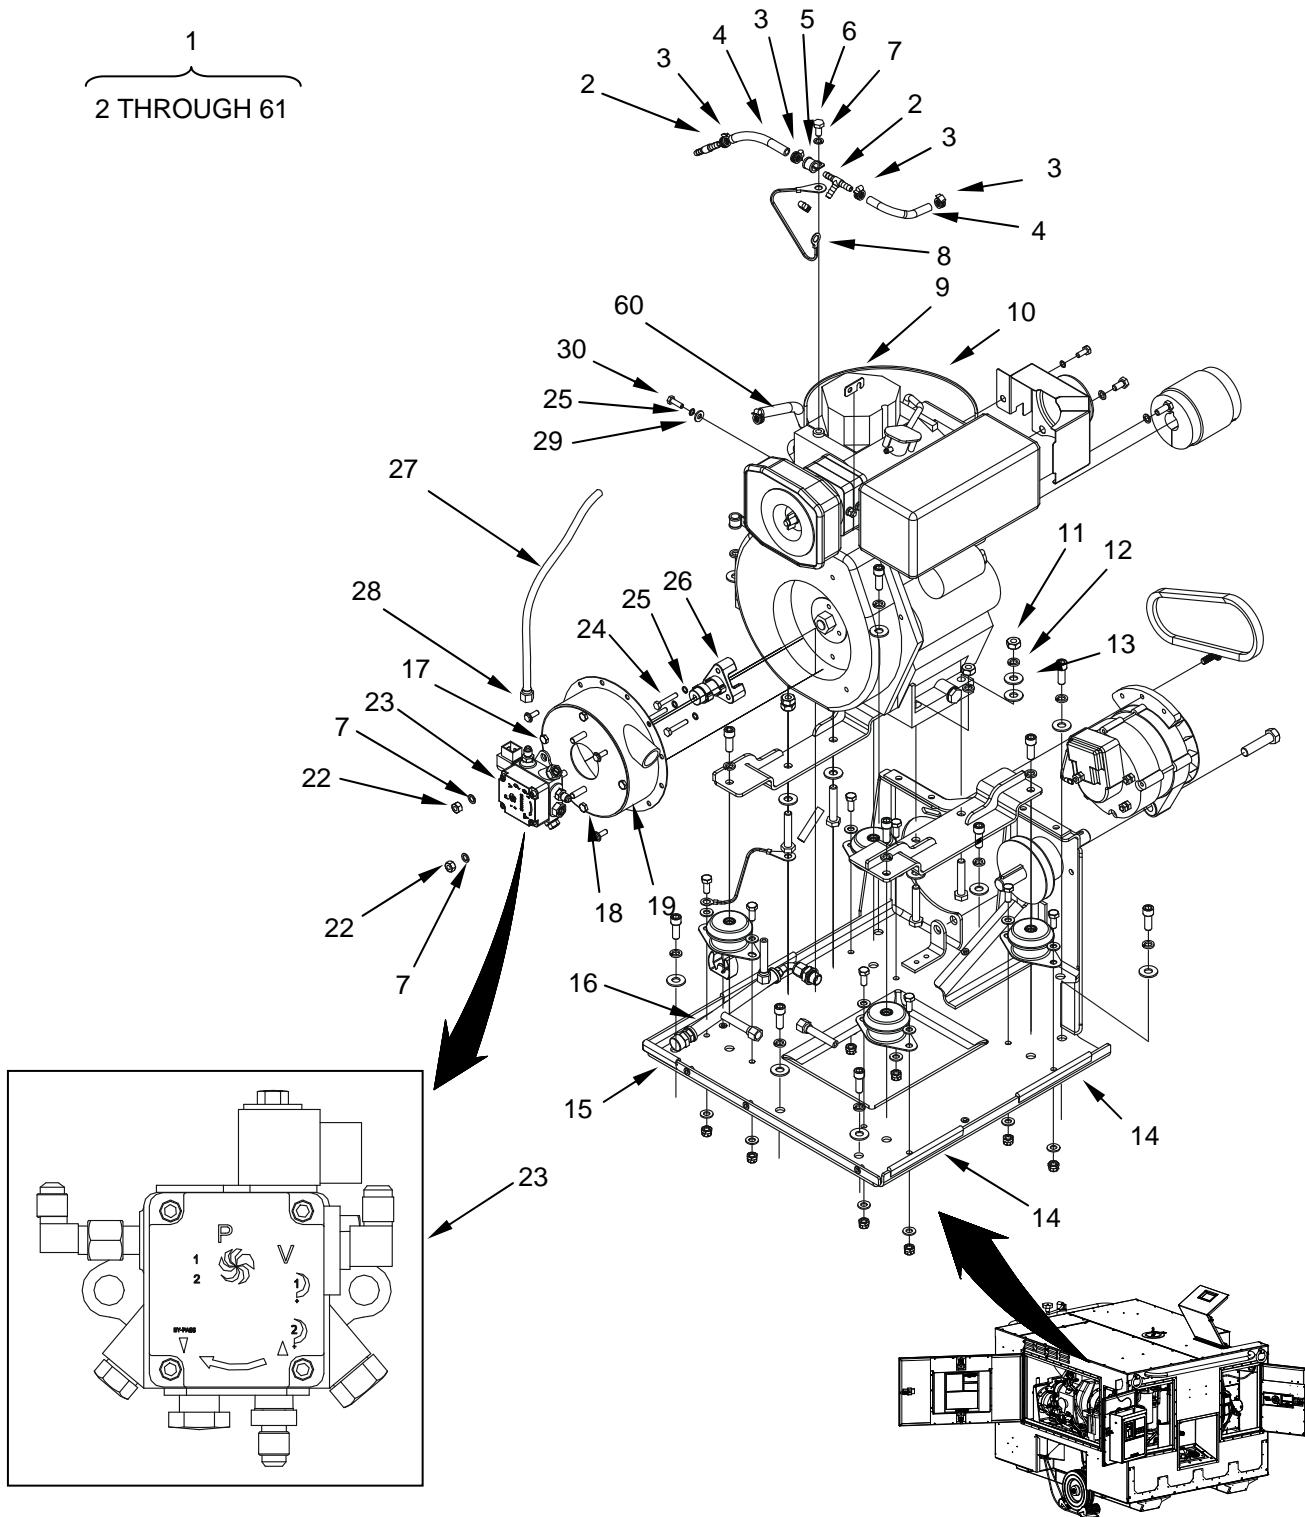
Assembly, Engine System (Rear View) (Sheet 1 of 2).
